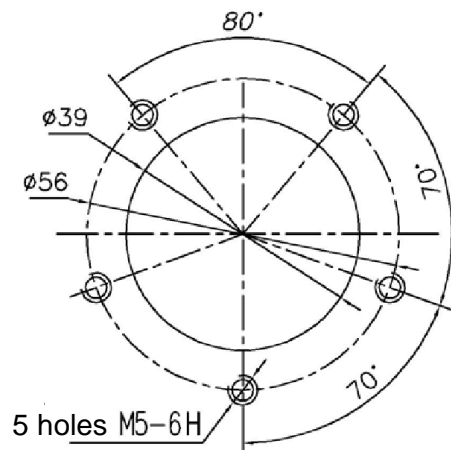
Drilling a tank according to the drawing with the holes' locations indication
